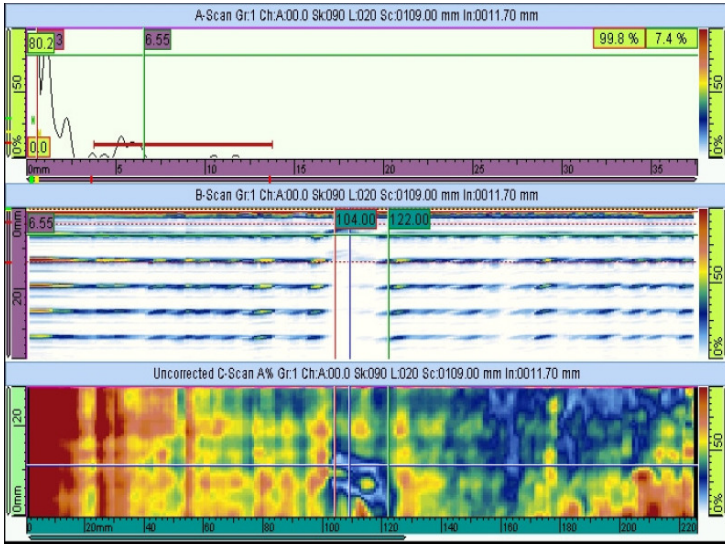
Pit with Gradual Wall Thinning Wall Loss %: 22%, Defect Length: 18mm
